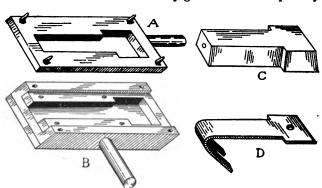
TOOLS USED TO ECONOMIZE TIME IN MAKING A LOCOMOTIVE BRAKE SHOE SPRING.
